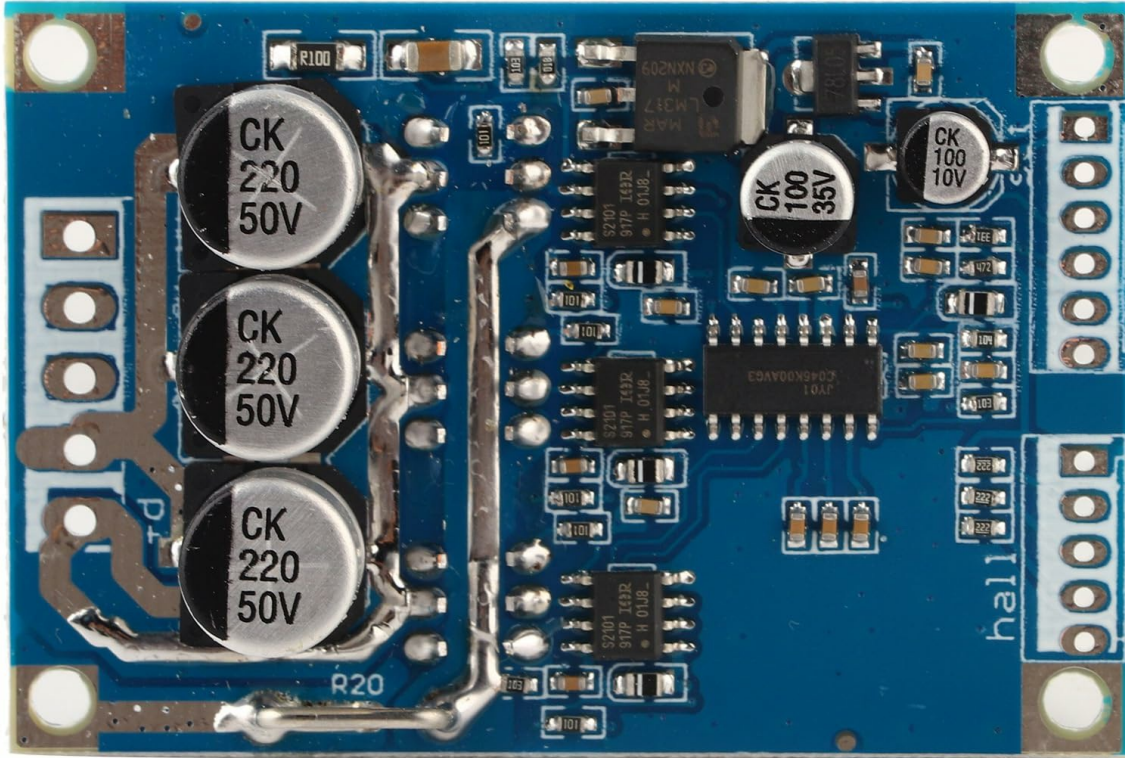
aqxreight Brushless Motor Controller with dimensions. The board measures approximately 6.4cm (2.52in) in length, 4.3cm (1.69in) in width, and 2cm (0.7in) in height.
